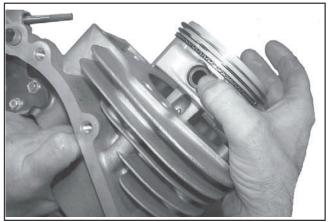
Removing Piston/Connecting Rod Assemblies.
